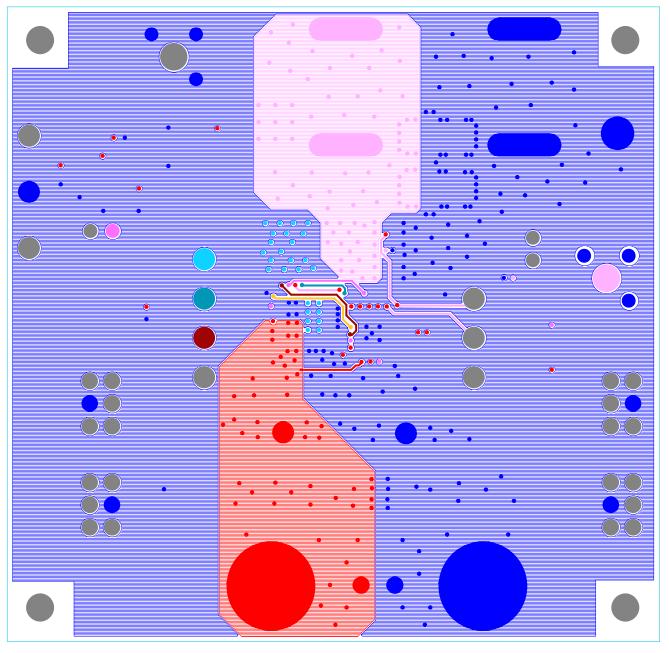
PCB - INNER LAYER 4 (TOP VIEW)
